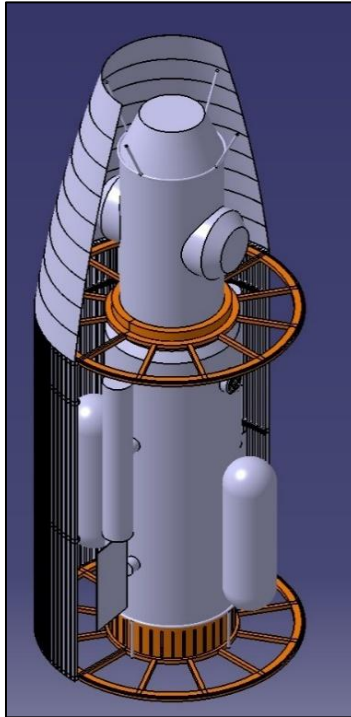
Isometric View of the Fixtures, Zvezda, and Starship
